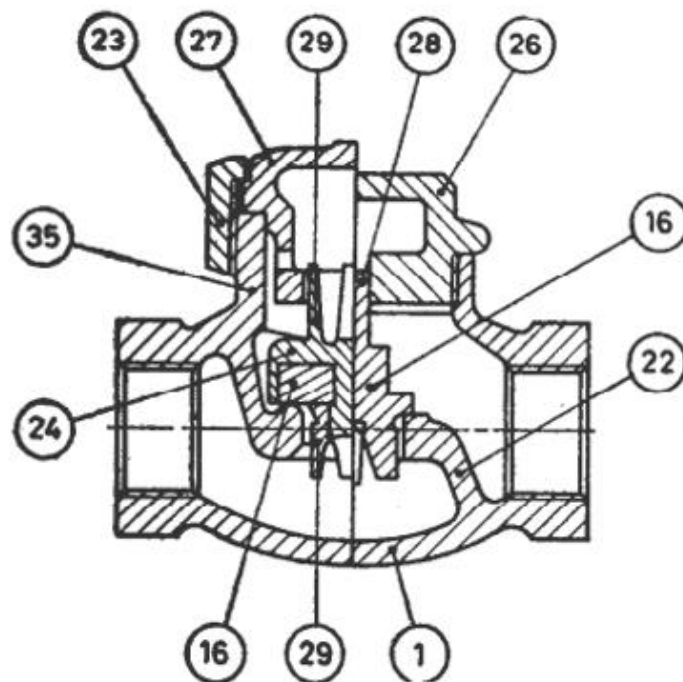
HORIZONTAL PATTERN LIFT TYPE DISK CHECK VALVE
